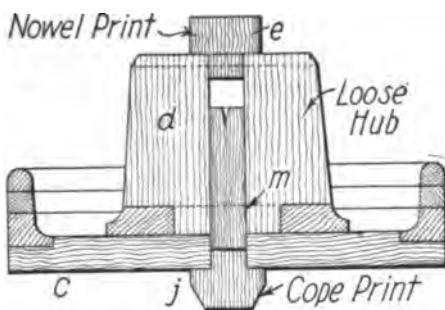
Section of Hand-Molded Pattern—Loose Hub and Prints
